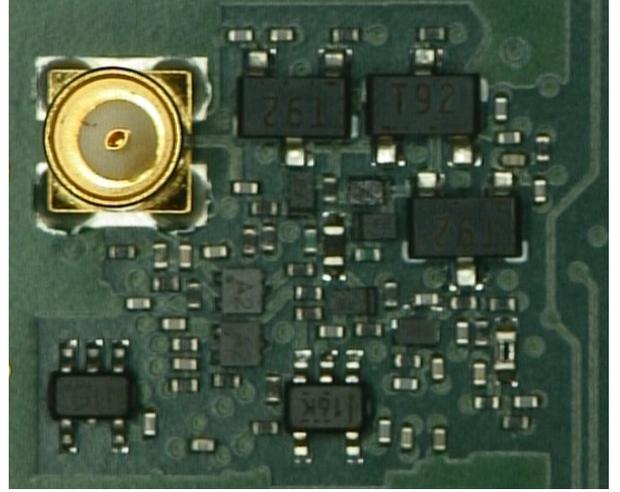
PCB of PDH circuit with dimensions of 20 mm x 15 mm.
